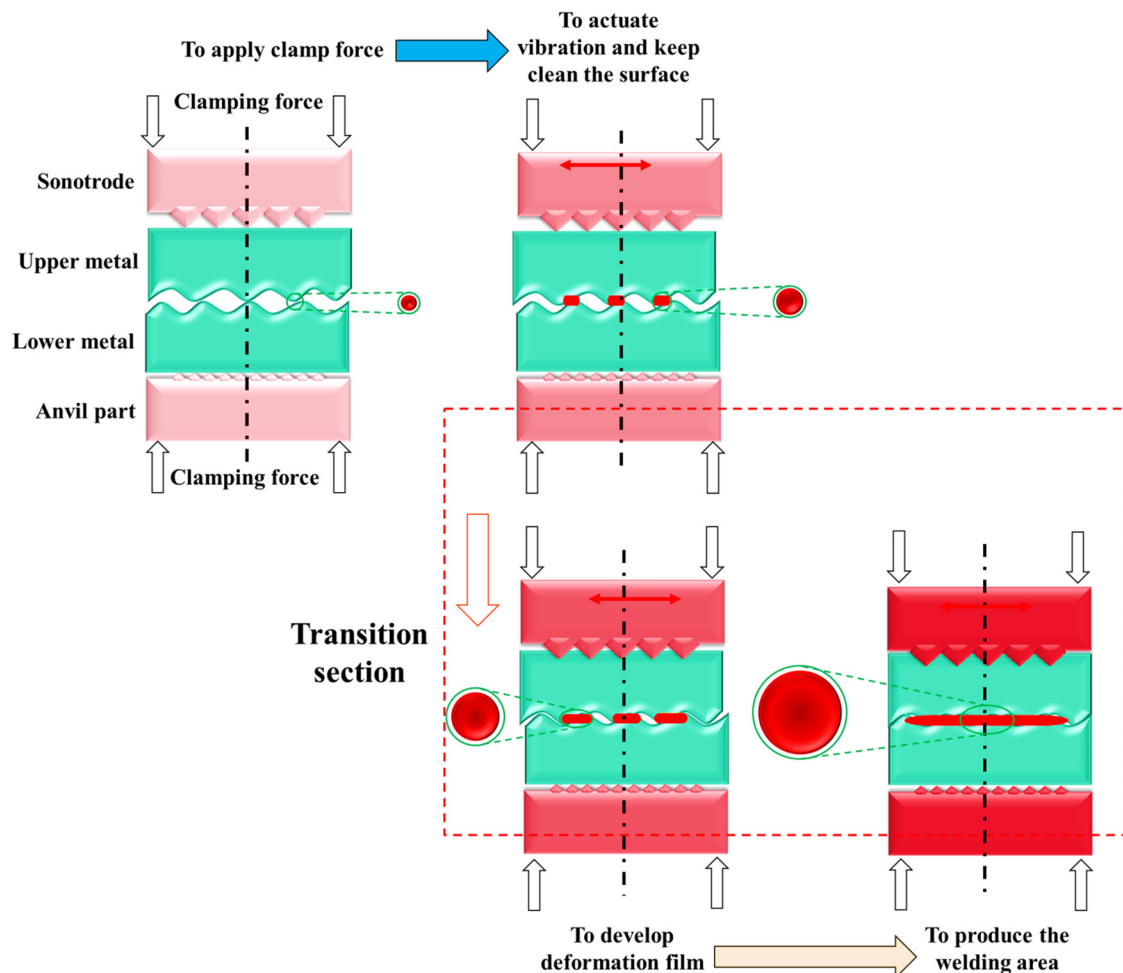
The working principle of ultrasonic welding process [42].
